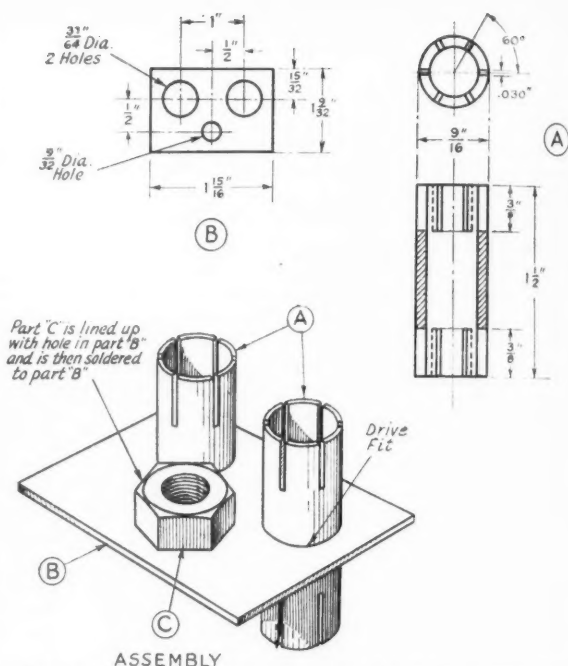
Shorting-bar details. "C" is a $\frac{1}{4}$ -inch brass nut serving as part of the drive mechanism. It is engaged by a threaded fiber rod, mounted as shown in the photograph, for knob tuning.
